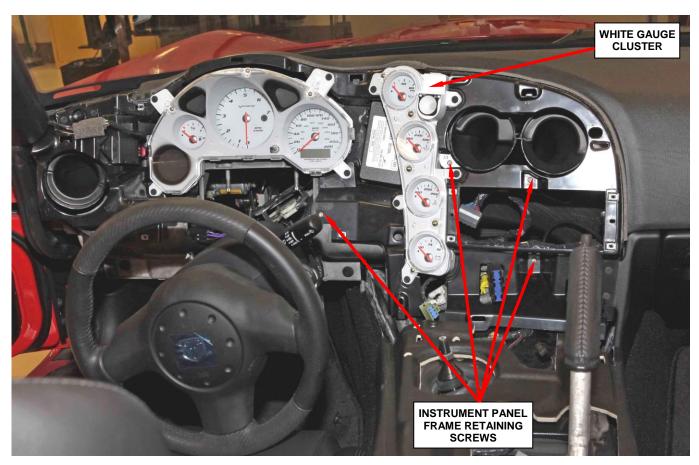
Instrument Panel Center Stack Gauge Cluster and Frame Retaining Screws
